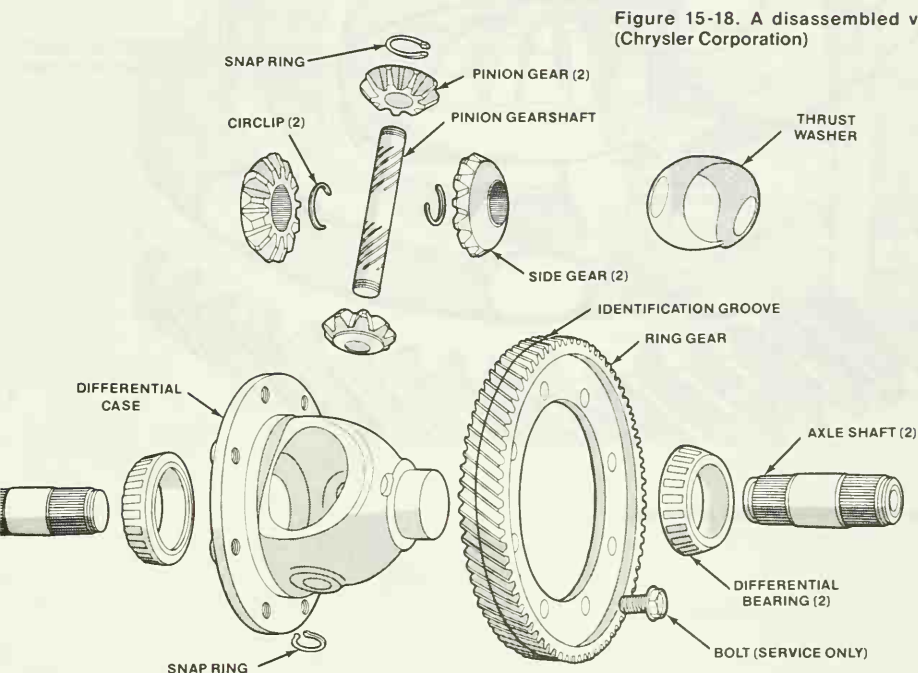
A disassembled view of the differential. (Chrysler Corporation)
